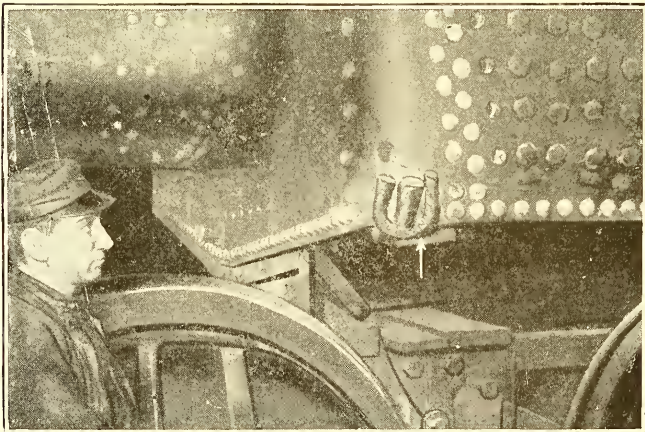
Thermit Weld on Mud Ring.
